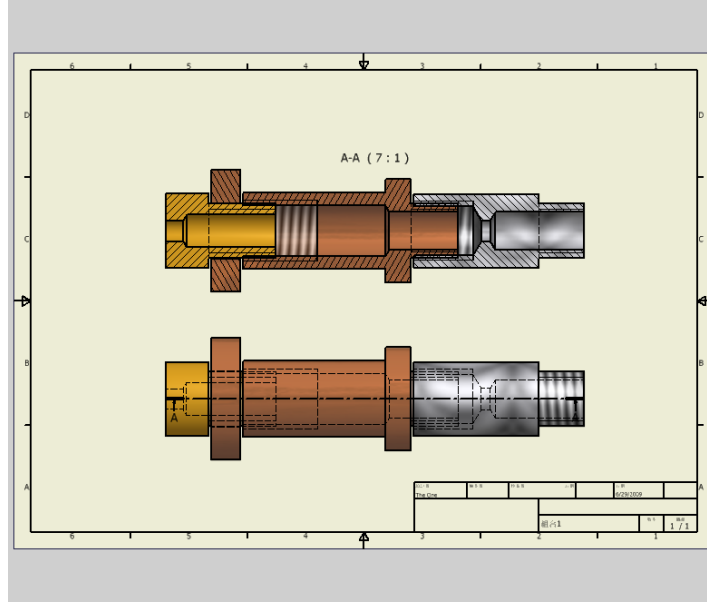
The shape of the heated-nozzle assembly. The middle part will be surrounded by thermalcoax heating element. The thermocouple will be soldered to the copper rind around the front nozzle.
